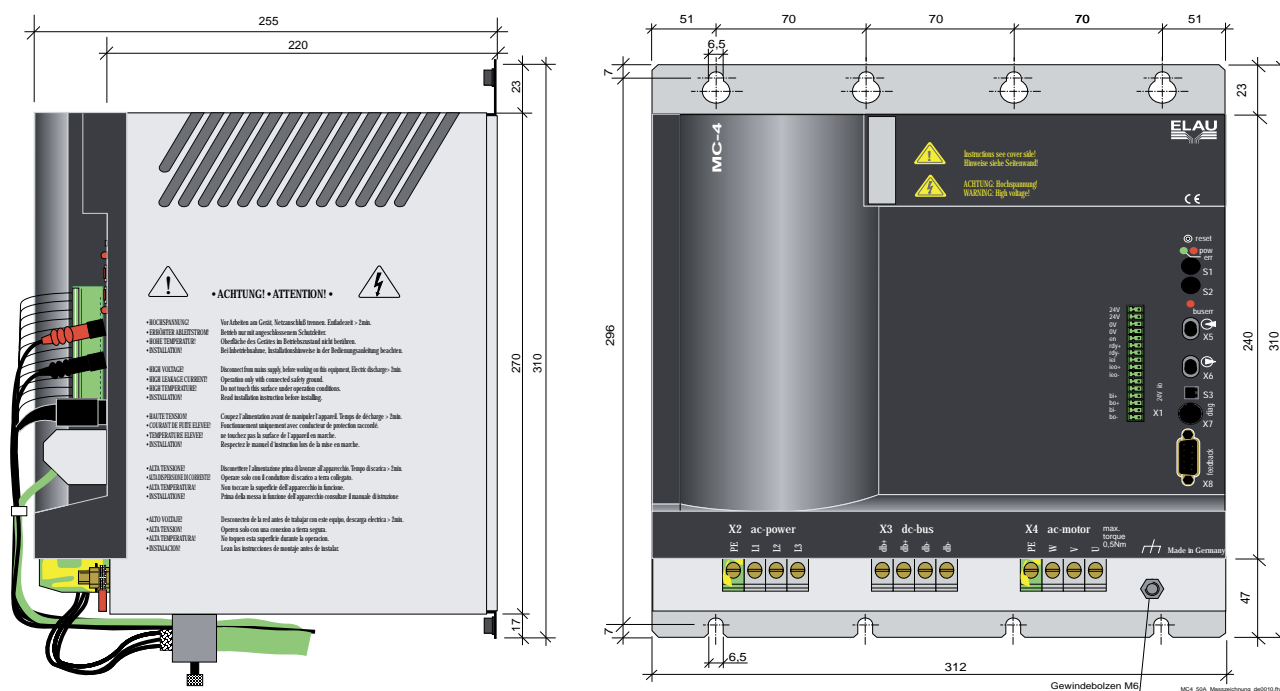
Dimensions of the PacDrive MC-4 / 50 A
